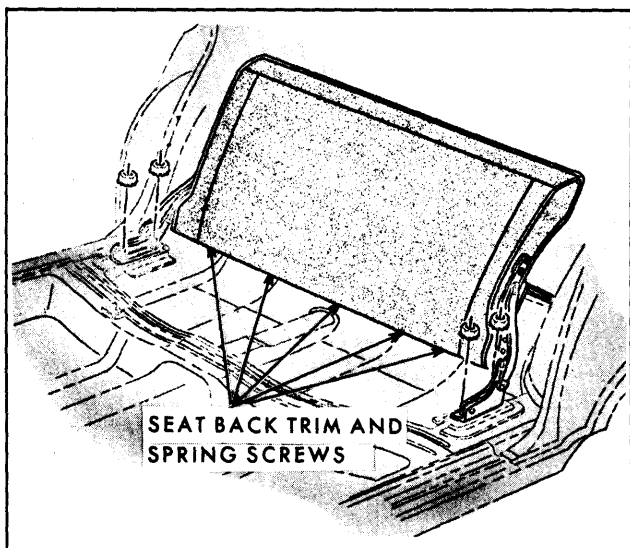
Second Seat Back Trim and Spring Assembly
